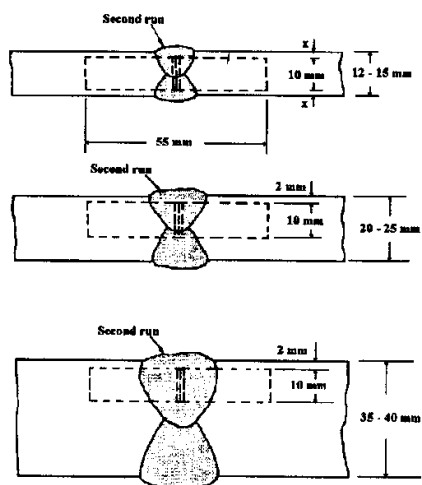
Butt weld test assemblies - two-run technique : position of impact test specimens
